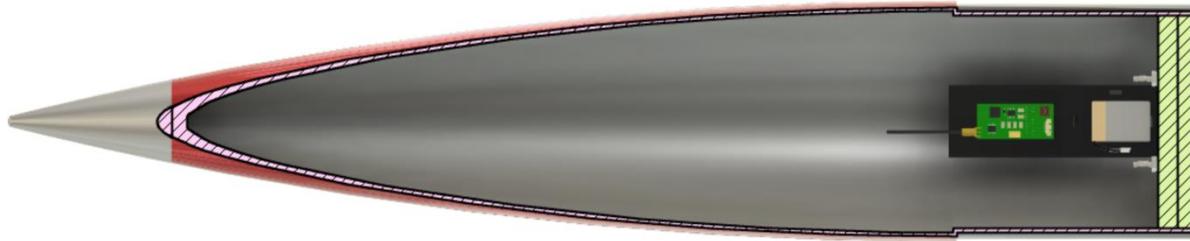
Section View of the Nose Cone 7 Telemetry Bay Assembly
